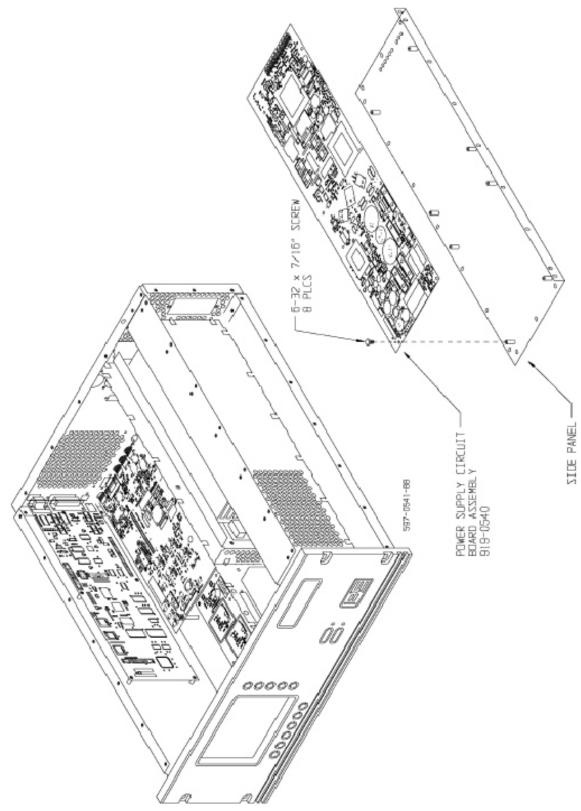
FXi POWER SUPPLY REMOVAL AND INSTALLATION (SHEET 1 OF 2)
